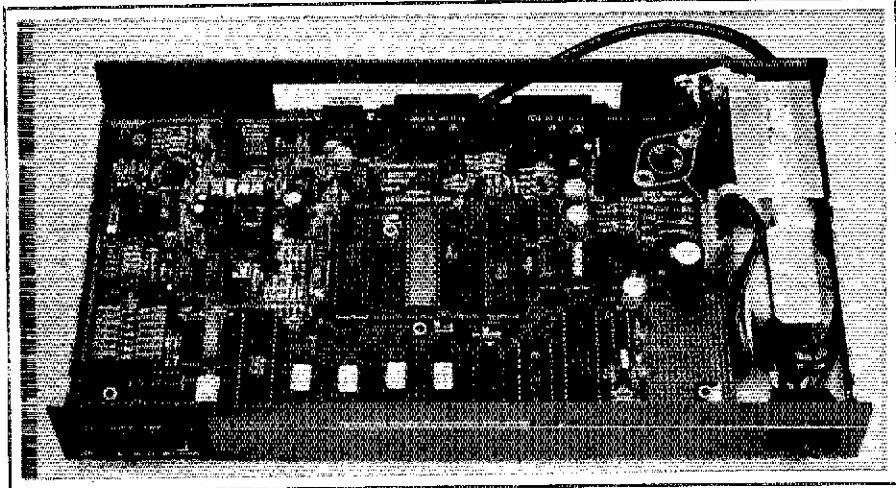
The Heathkit HD-4040 is supplied in kit form, with cabinet and power supply, and can be assembled in about 10 hours. The power-supply regulator mounts to the rear cabinet panel, eliminating the heat sink.
